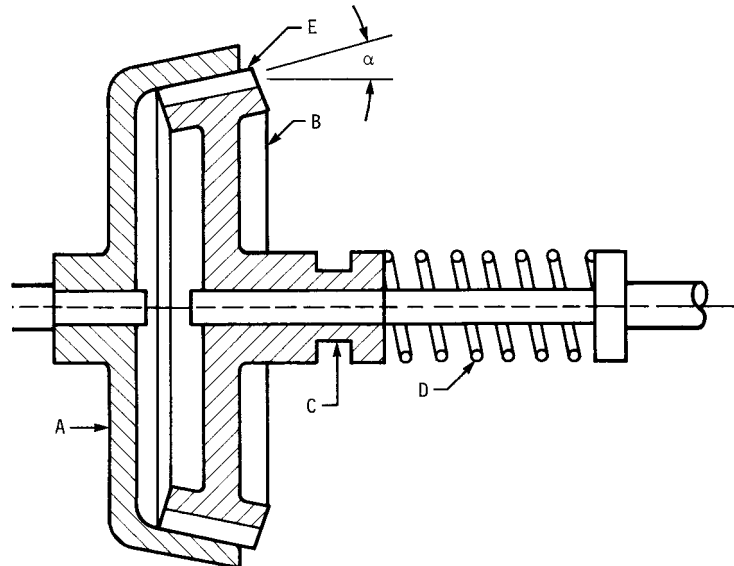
Cone clutch; *A*, cup; *B*, cone; *C*, shifting groove; *D*, spring; *E*, friction lining; α = cone angle.
